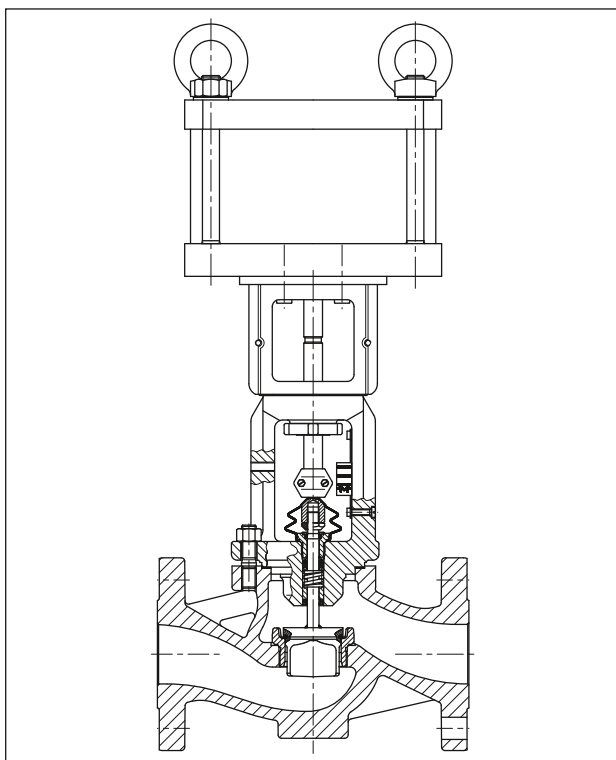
Type 3241 Valve with Type 3275A Pneumatic Piston Actuator (Type 3241-9 Control Valve)
